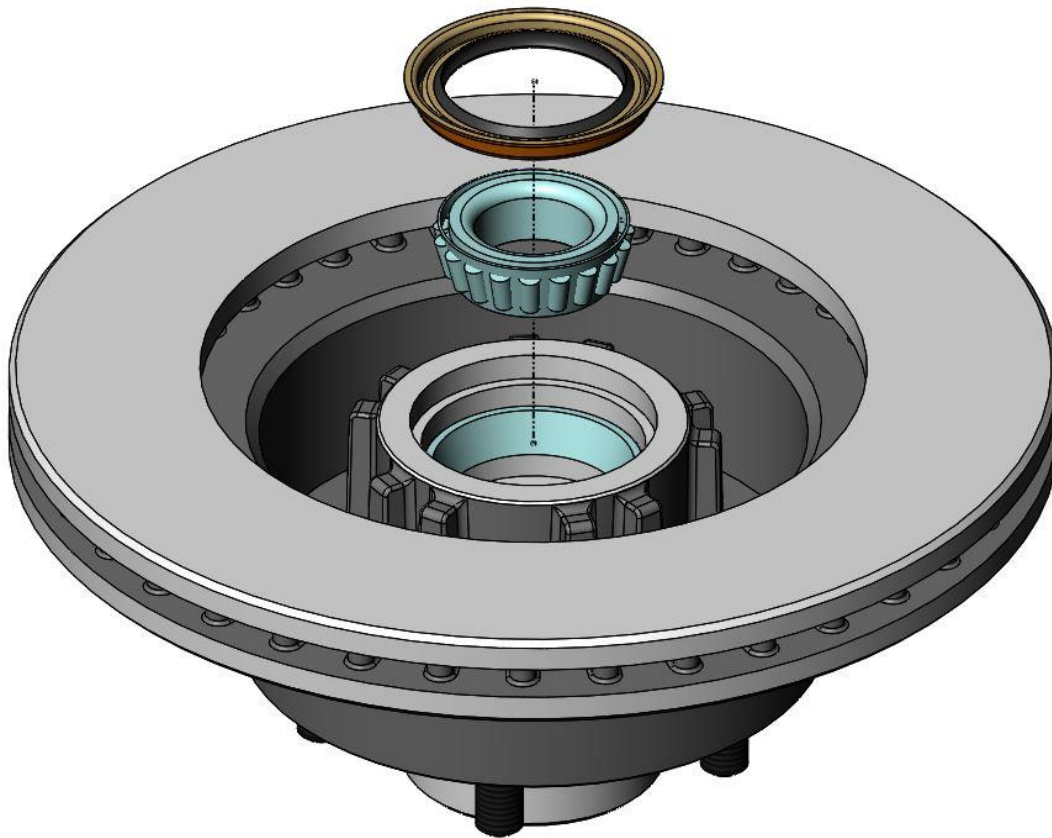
Inner Wheel Bearing and Grease Seal Installation
